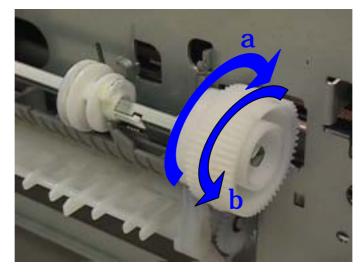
Positioning in LIFT CAM SHAFT ASS'Y adjustment 2
